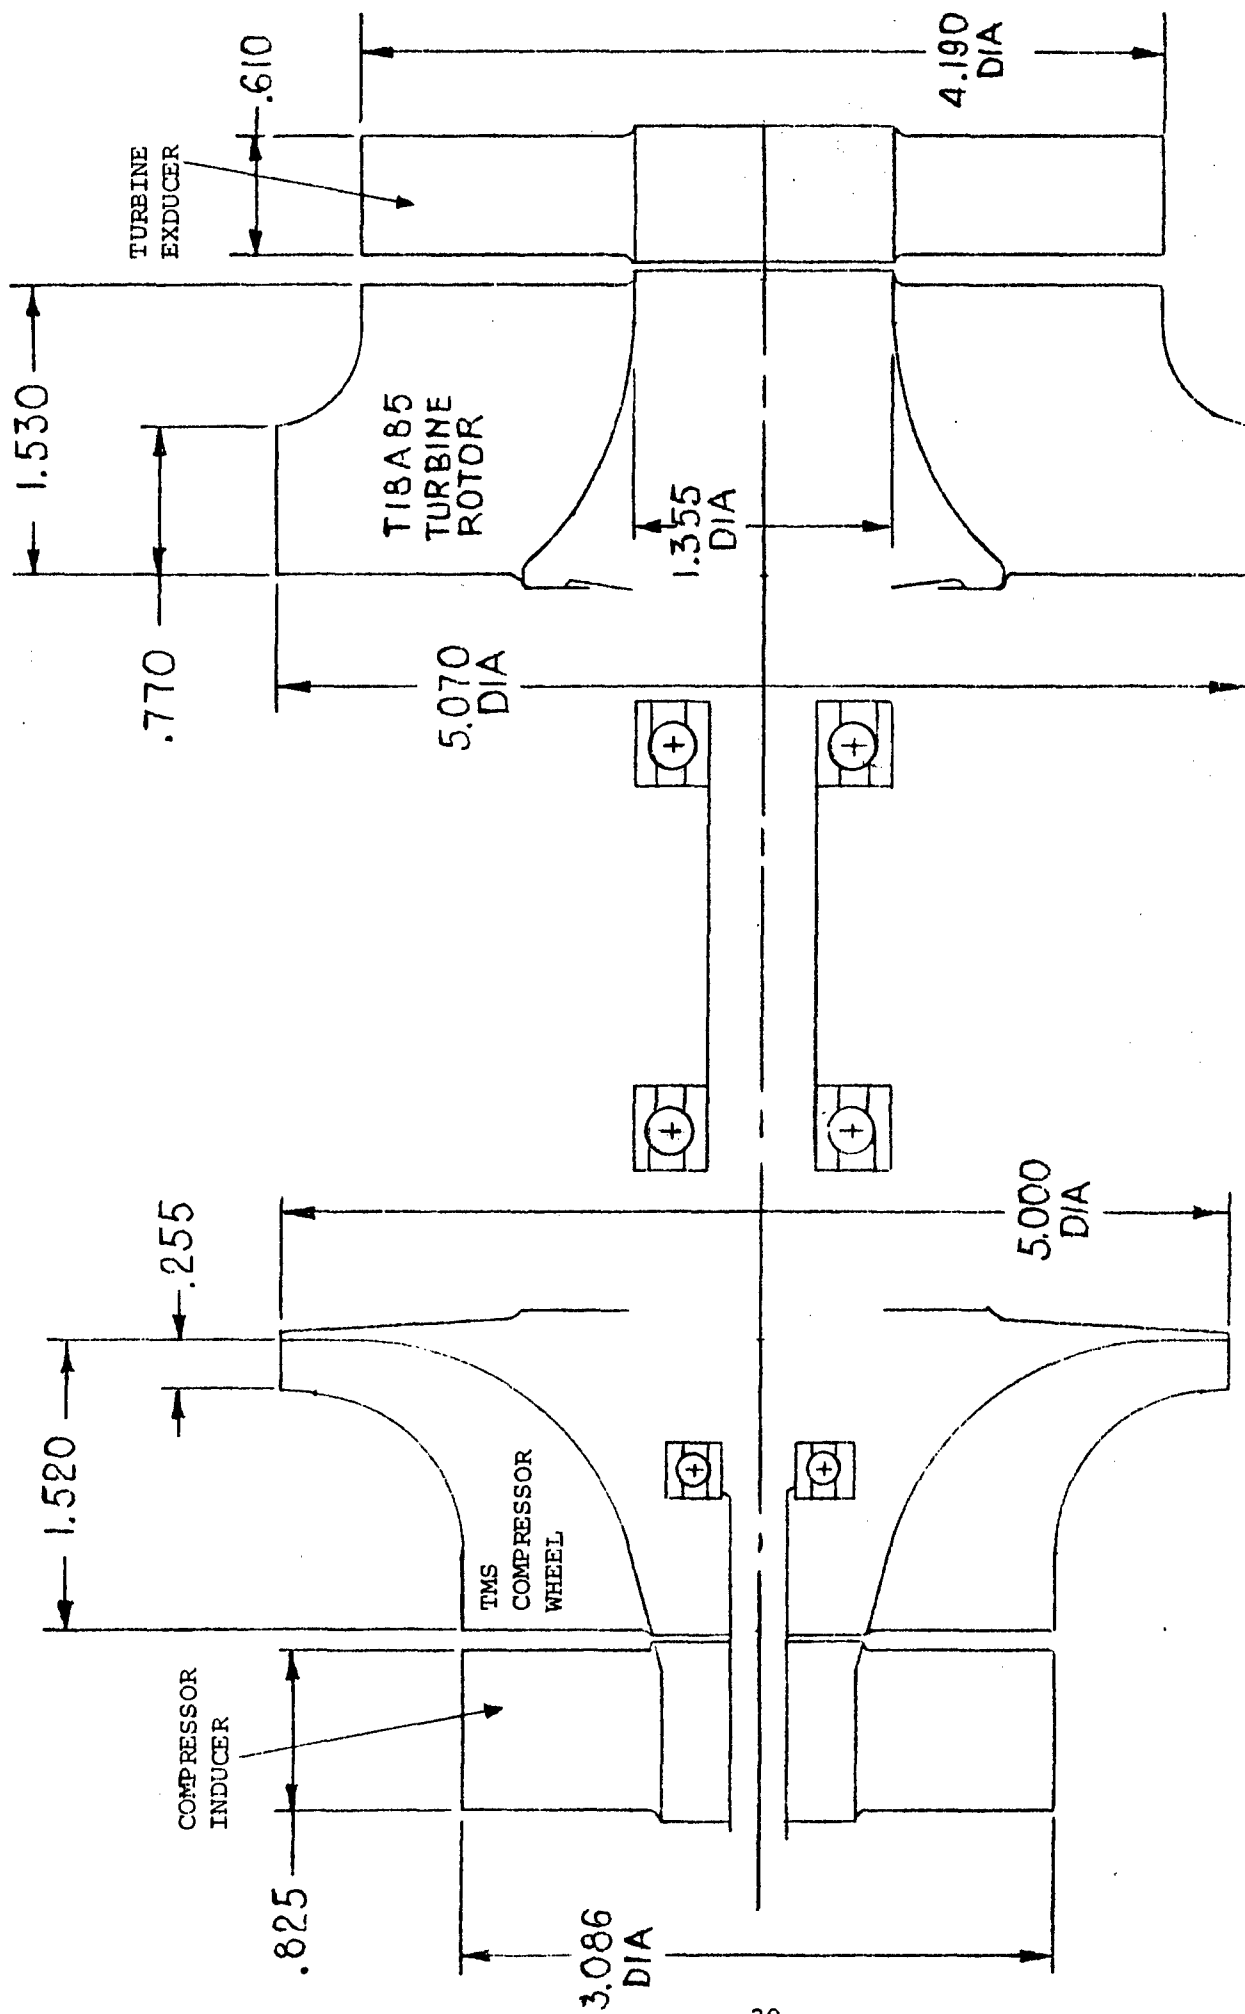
Twin-spool compressor and turbine wheel designs (using AID T18A85 turbine rotors and TMS 5" OD compressor wheels)
